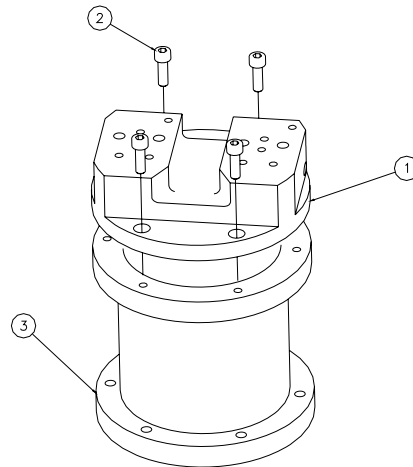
AGMD-278-US90 Dual Head Adapter Parts Identification (Top View)
